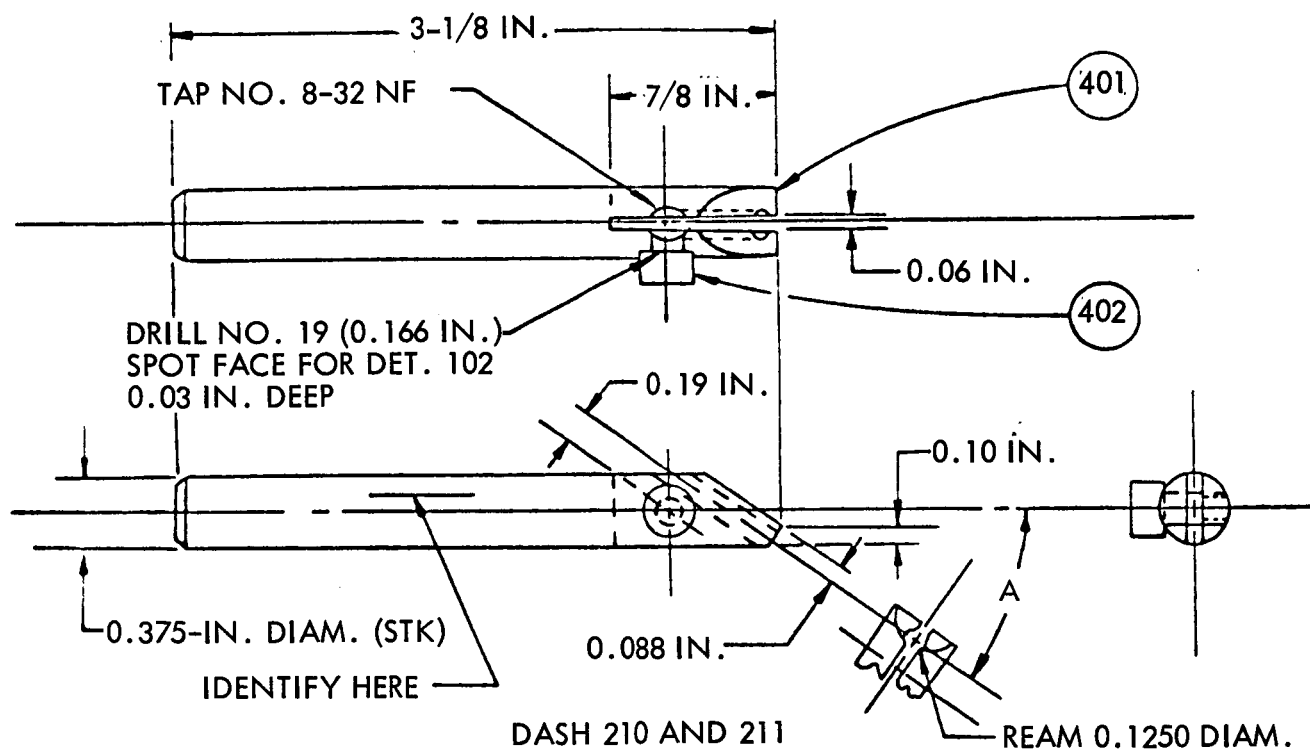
Electrode Holder Used With RAYTHEON Model OB and WELDMATIC Model 02-032-03 Welding Heads
